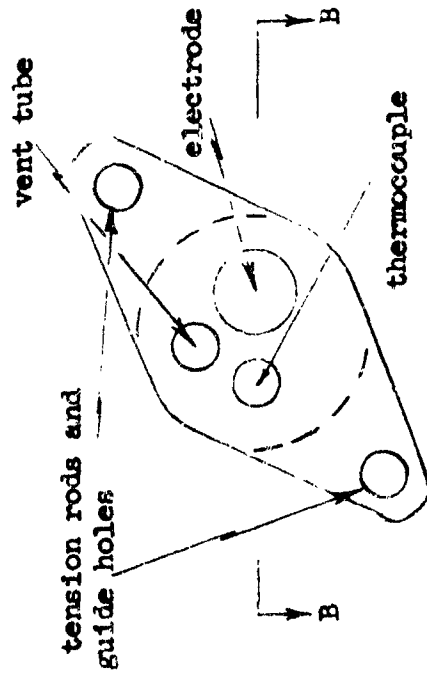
Detailed drawing of cell vacuum seal unit (actual size).
